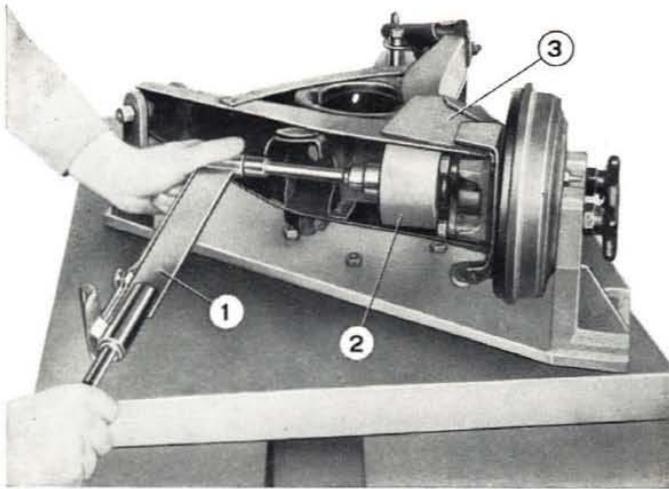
Installing wheel shaft flexible joint on work bench.
